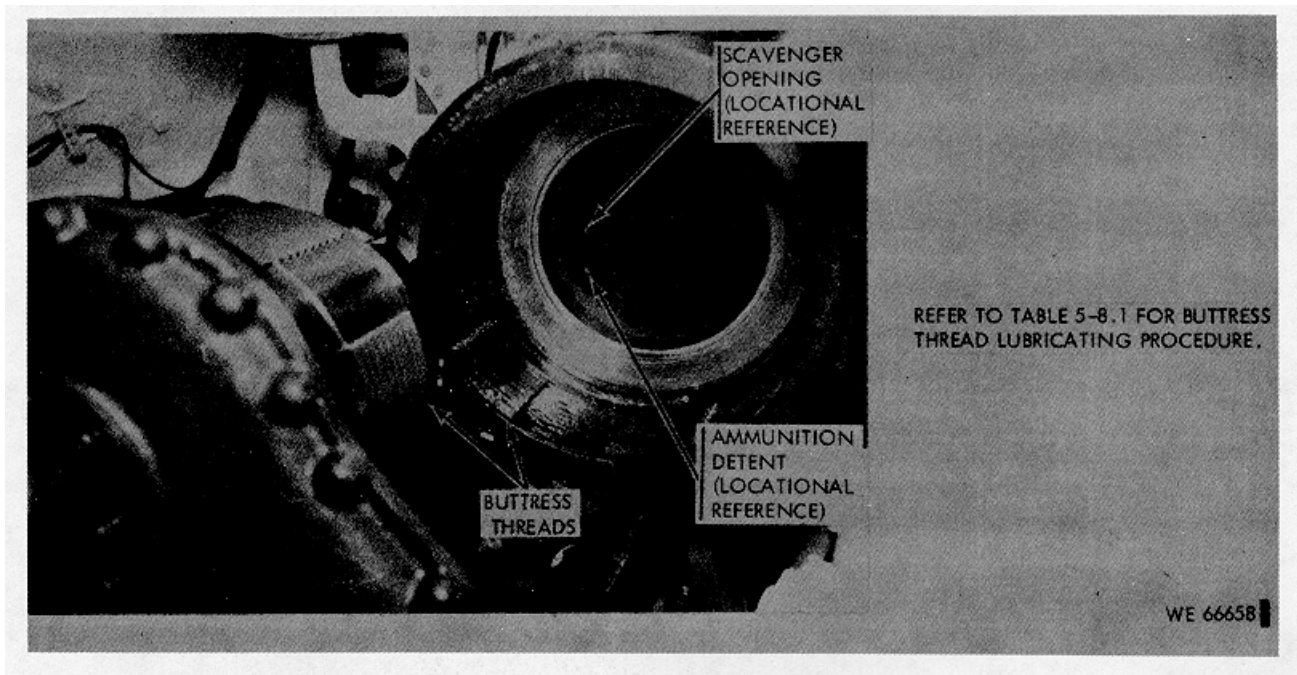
Gun-launcher buttress threads, and ammunition detent and scavenger openings
